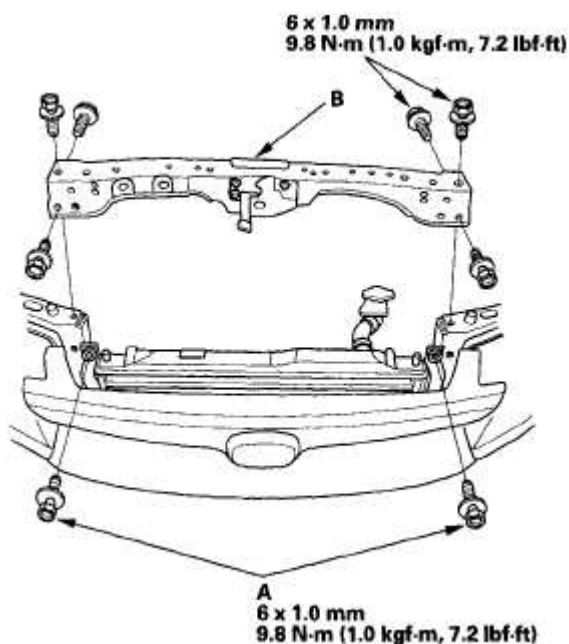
Identifying Condenser Bracket Mounting Bolts And Bulkhead With Tightening Torque
